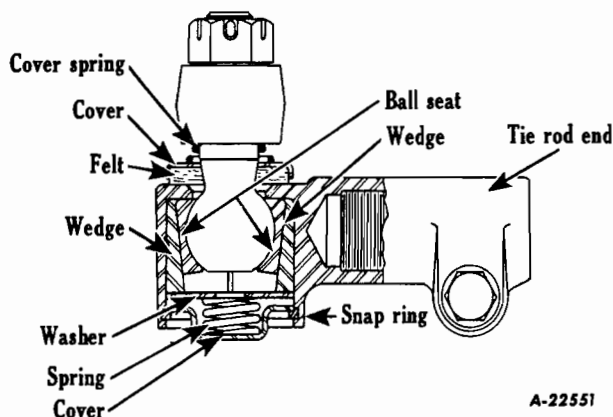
Tie rod assembly - Models F-553, F-580, F-653, F-750, F-751.
